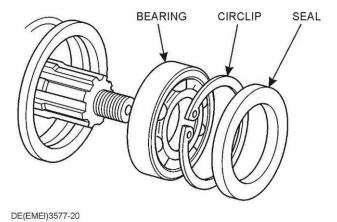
Installation of the Output Shaft Bearing, Circlip and Oil Seal
